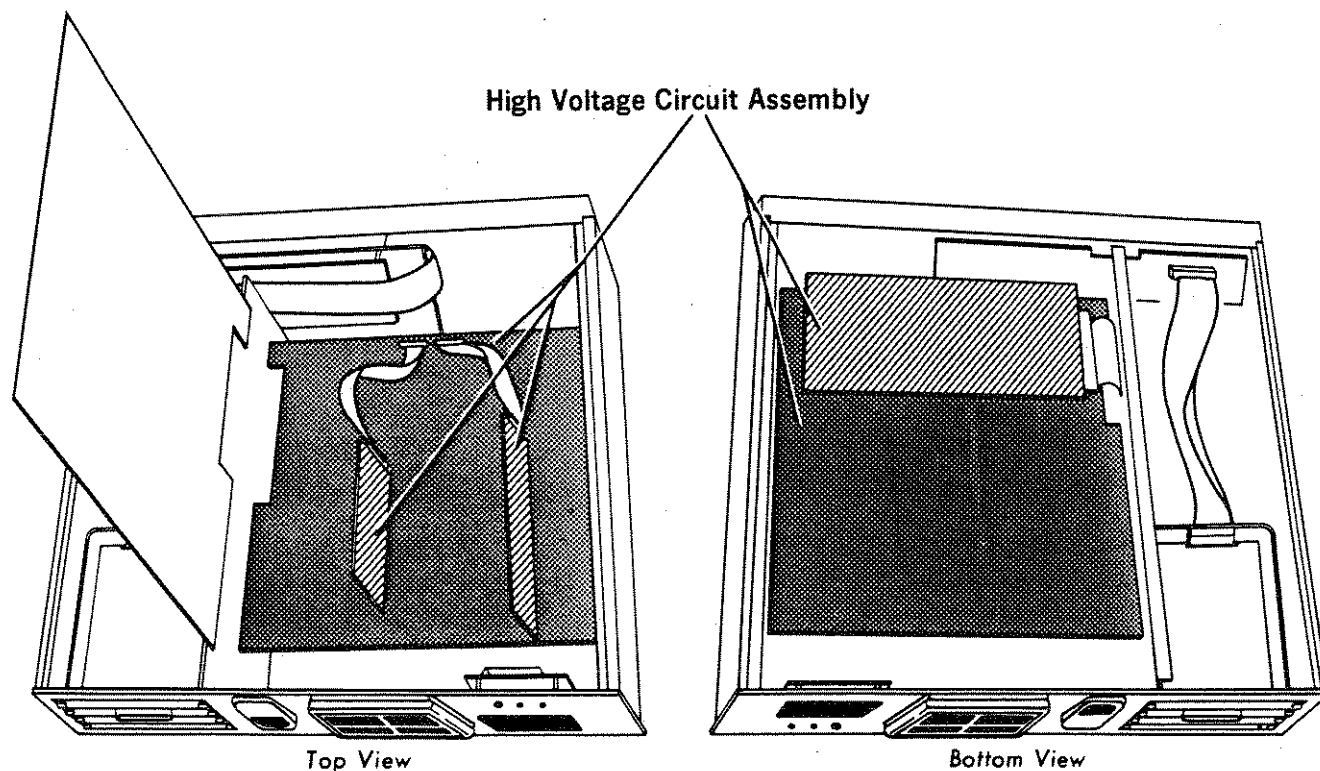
Location of High Voltage Circuit Assembly (P/N 59038)
